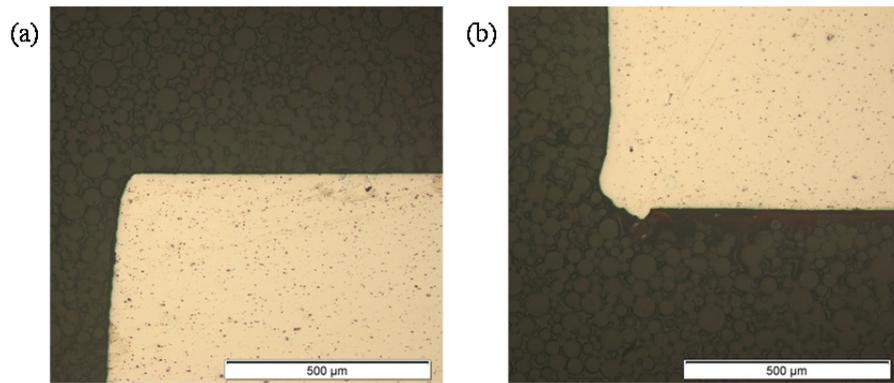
cross sections of the (a) upper edge and (b) lower edge of 3 mm thick aluminum sheet (AlMg3).
